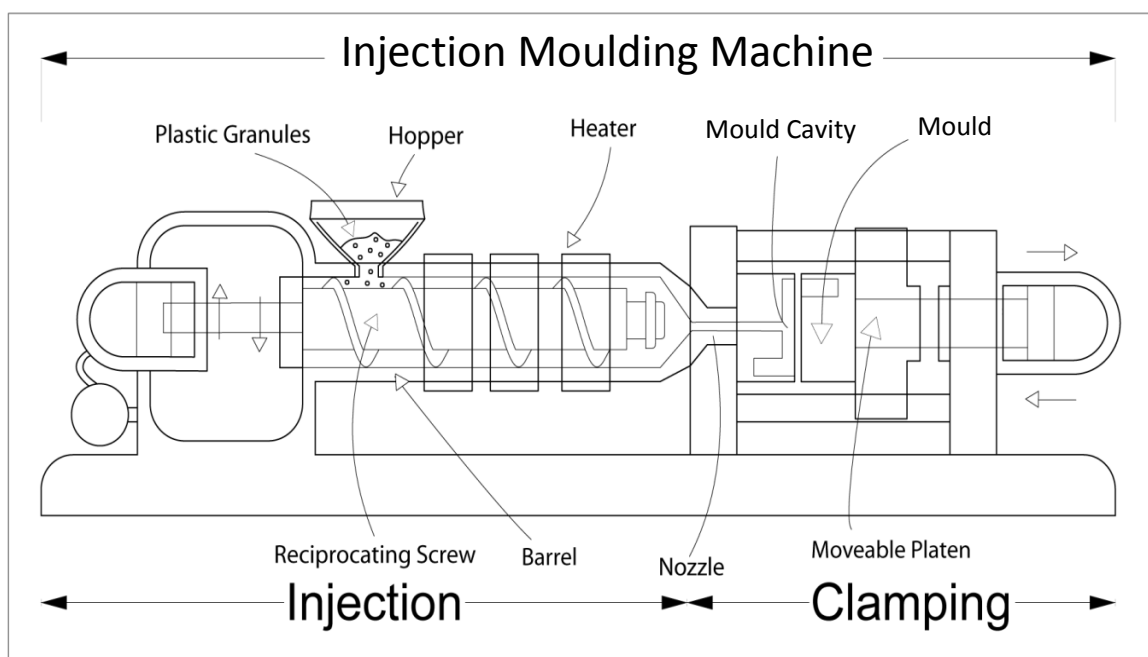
2D REPRESENTATION OF AN INJECTION MOULDING MACHINE
